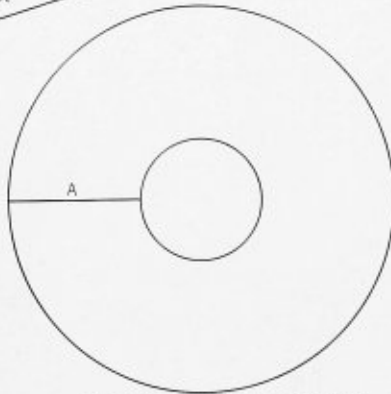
PATTERN FOR CONVEYOR SECTIONS
